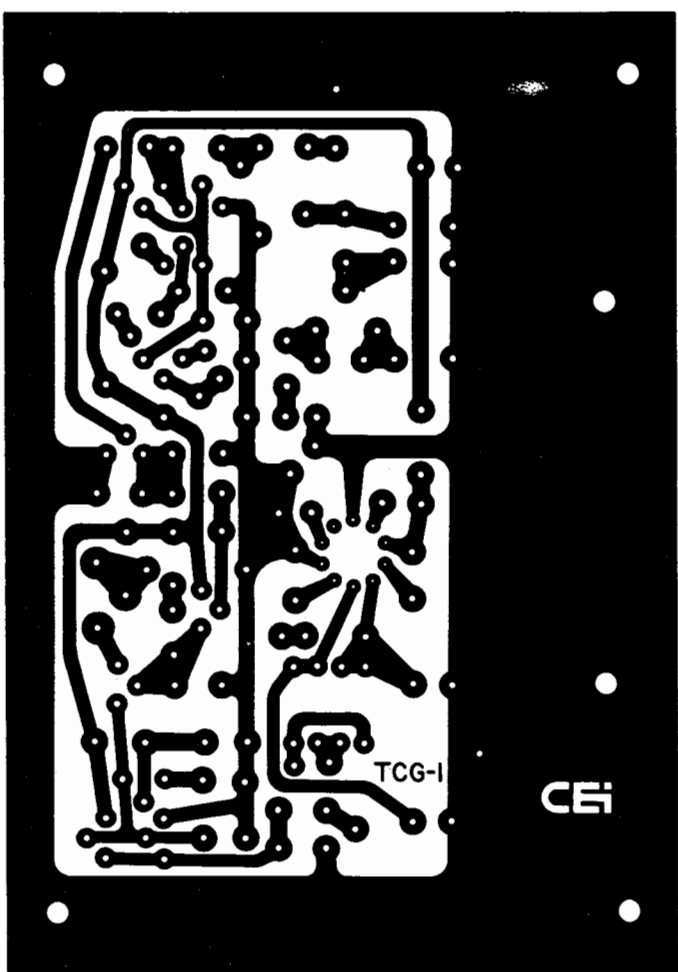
THE PRINTED-CIRCUIT board pattern, as viewed from the copper side, is shown here actual size. The board measures $3\frac{1}{2}$ in. x 5 in.
